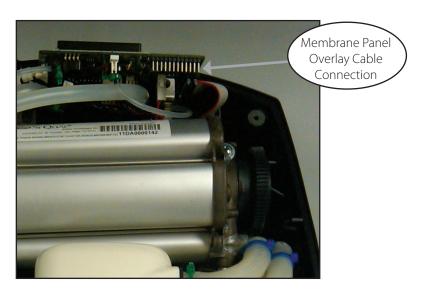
Removing the Membrane Panel Overlay Ribbon Cable.
